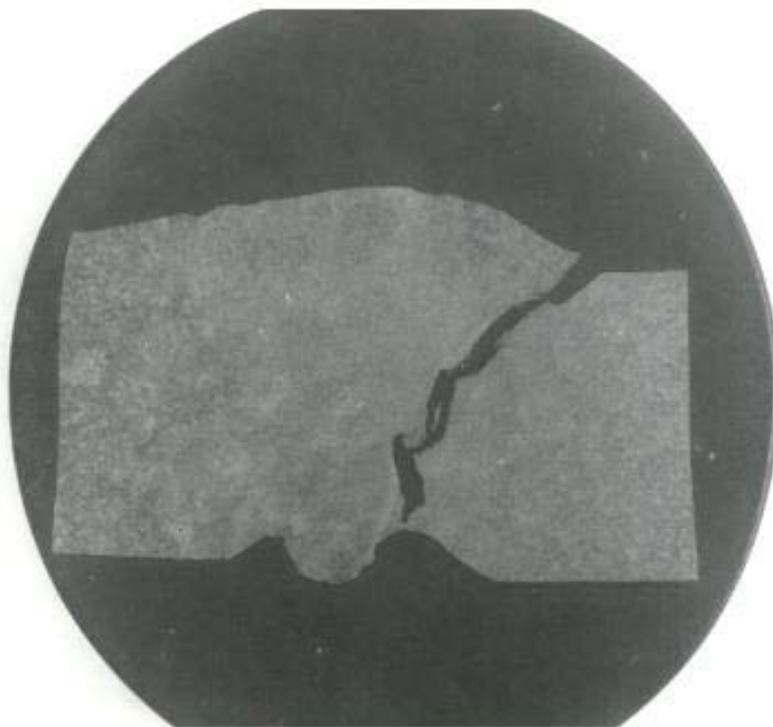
The metallographic cross-section shows the crack follows the weld metal. Mag. 4x
